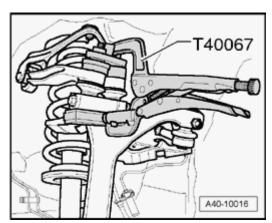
Inserting Both Upper Link Joint Pins In Wheel Bearing Housing And Bend Downward As Much As Possible Using Pliers T40067
